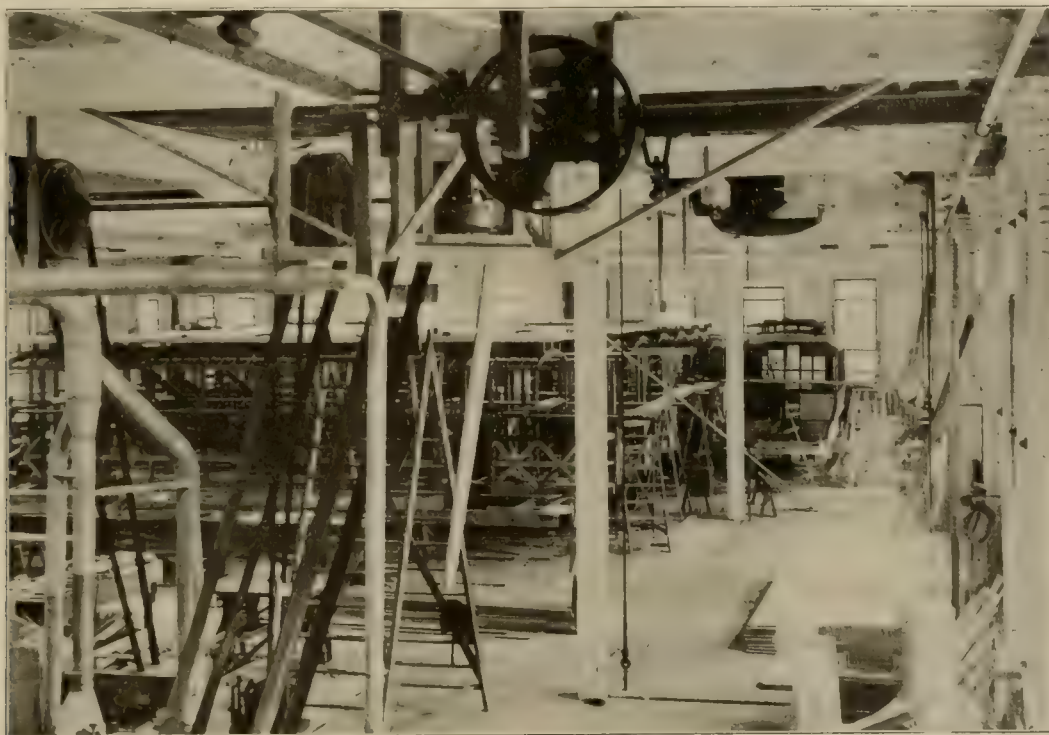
CARS UNDER CONSTRUCTION AND ONE REBUILDING.
